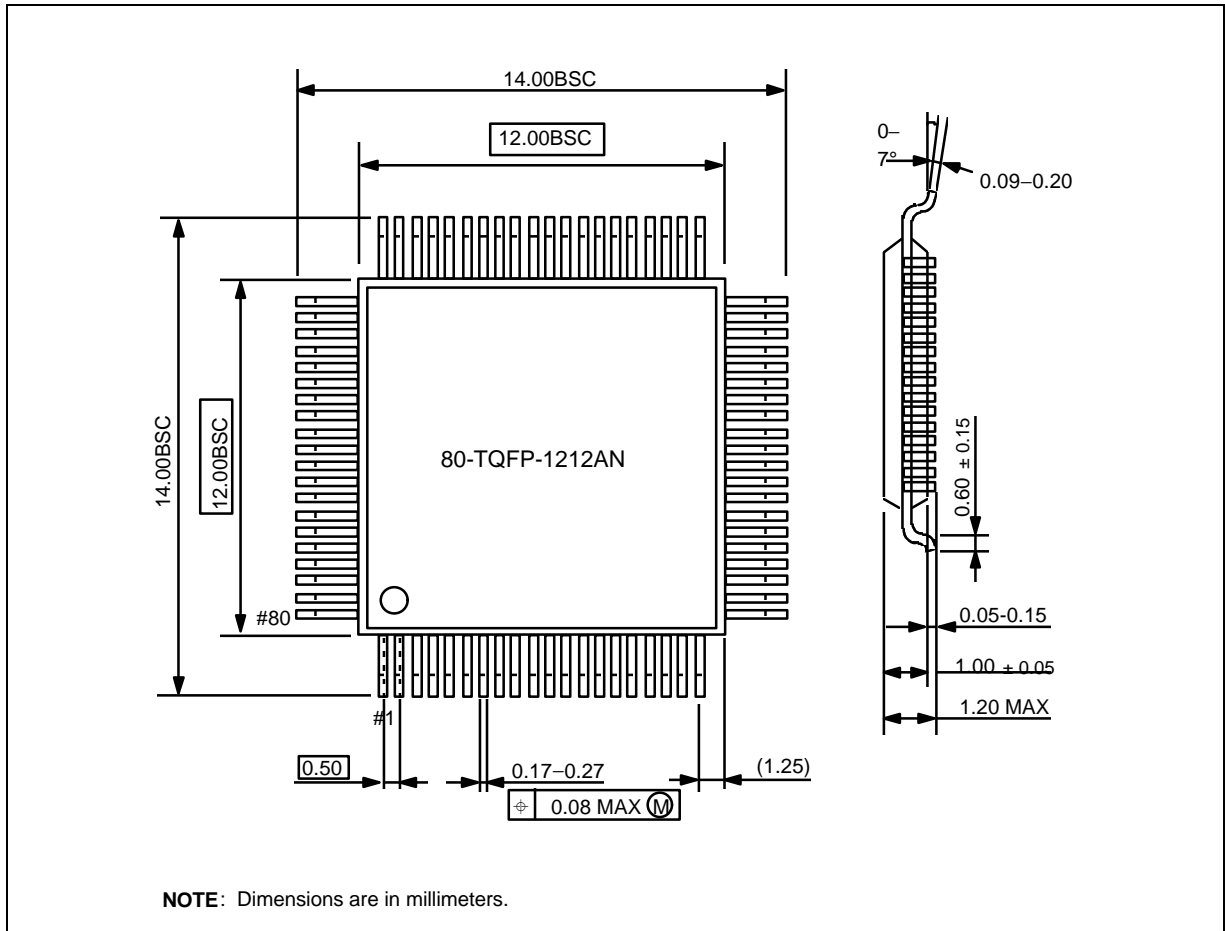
80-TQFP-1212AN Package Dimensions
